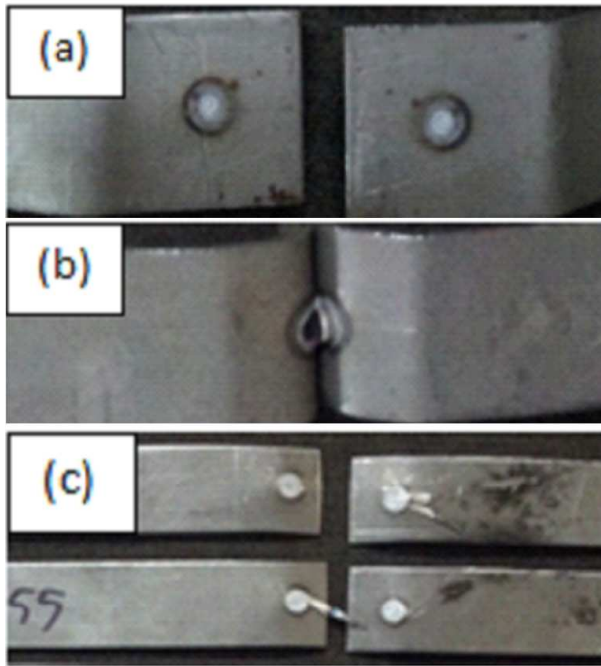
(a) Separation failure, (b) knotting failure and (c) spurt out failure observed in weld nuggets.
